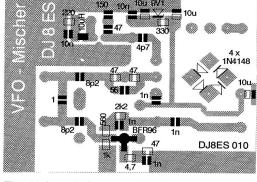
Layout of the mixer PCB (ground-plane side)
